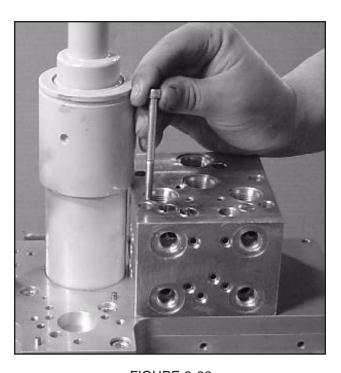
Use a 5mm allen wrench to install the Super V Valve Block to the Base Plate. Torque the five M6-1p x 70mm bolts to 85-90 in. lbs.
